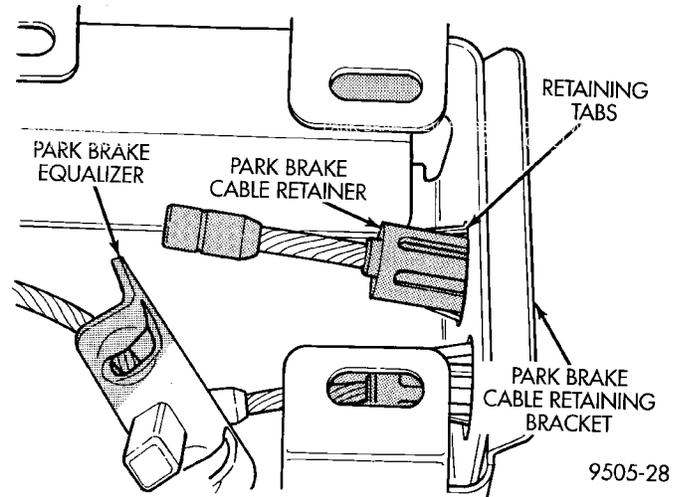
Park Brake Cable Installed In Retaining Bracket
